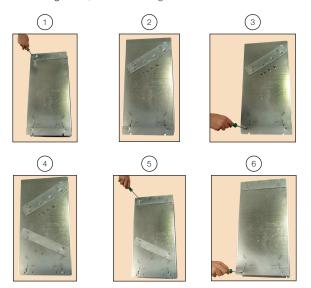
Repositioning of the mounting supports for sizes A to E. In frame sizes F, G and H the mounting supports must be removed
